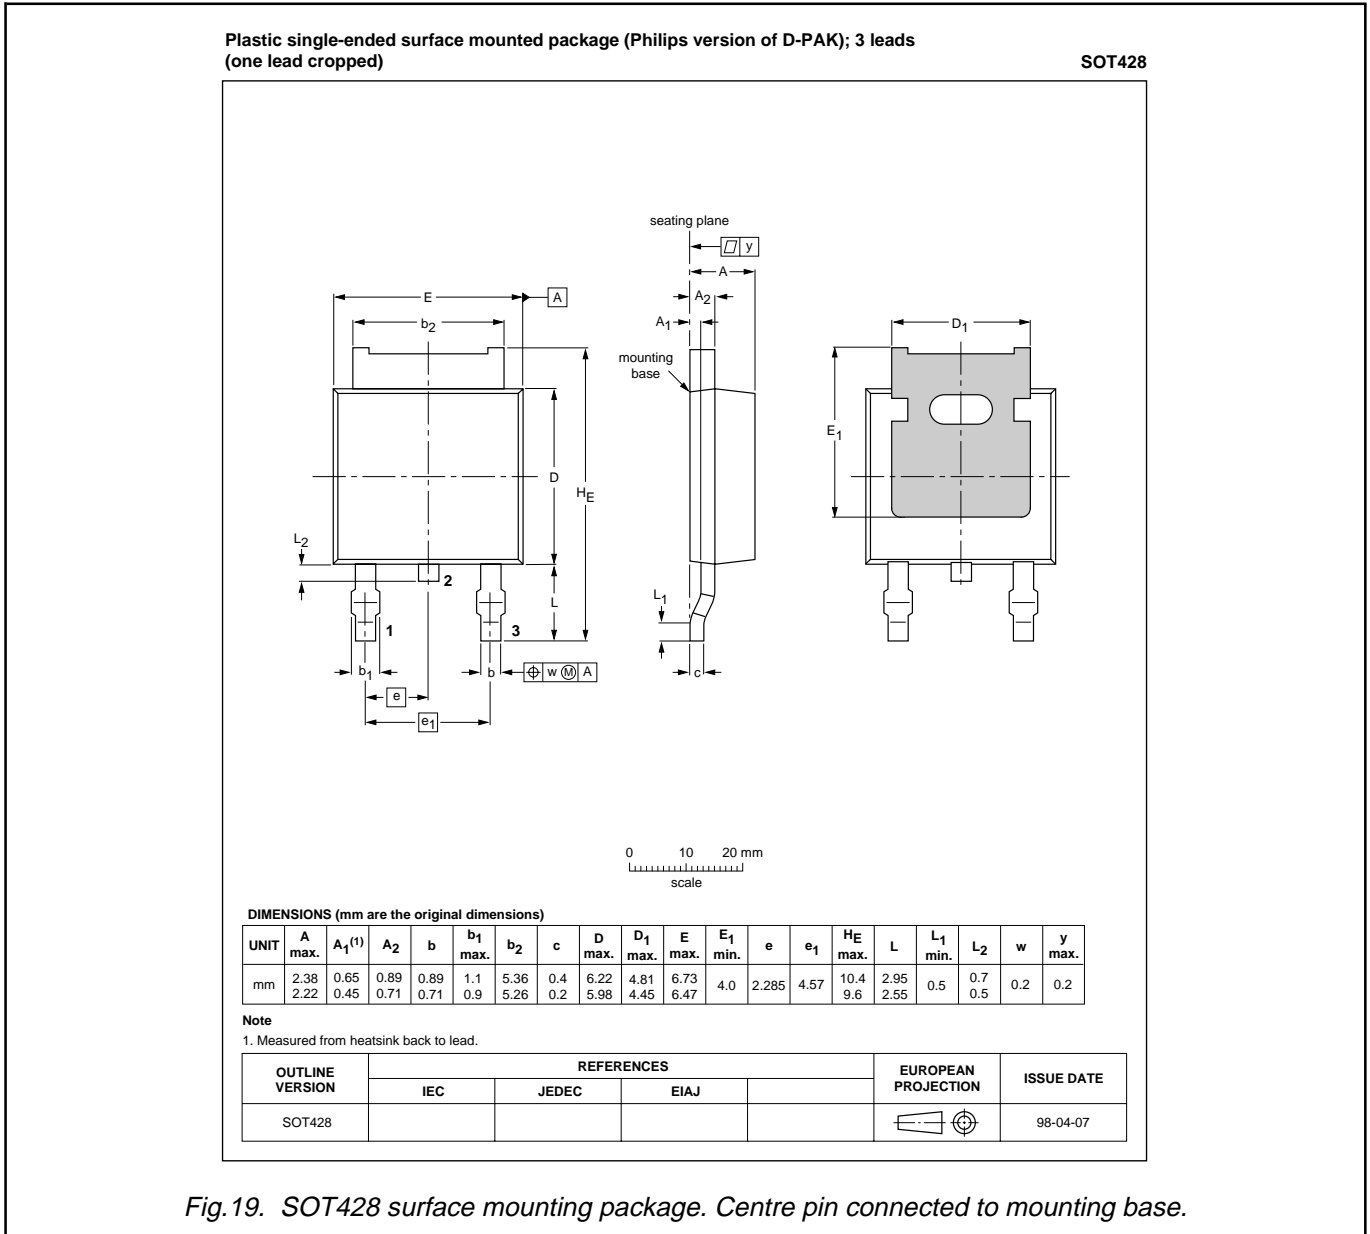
SOT428 surface mounting package. Centre pin connected to mounting base.
